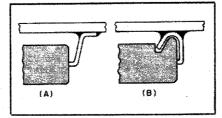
SMD lead variations. Gull-wing leads (A) are inspected easily; they can be accessed with test probes. The J-shaped counterparts (B) have a smaller PC-board footprint and are handled easily by automatic feeding machines.
